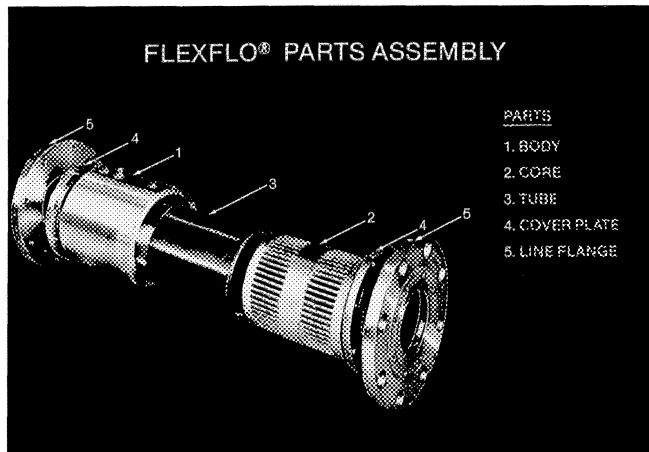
Disassembled Grove Flexflo Flexible Rubber Sleeve Valve
